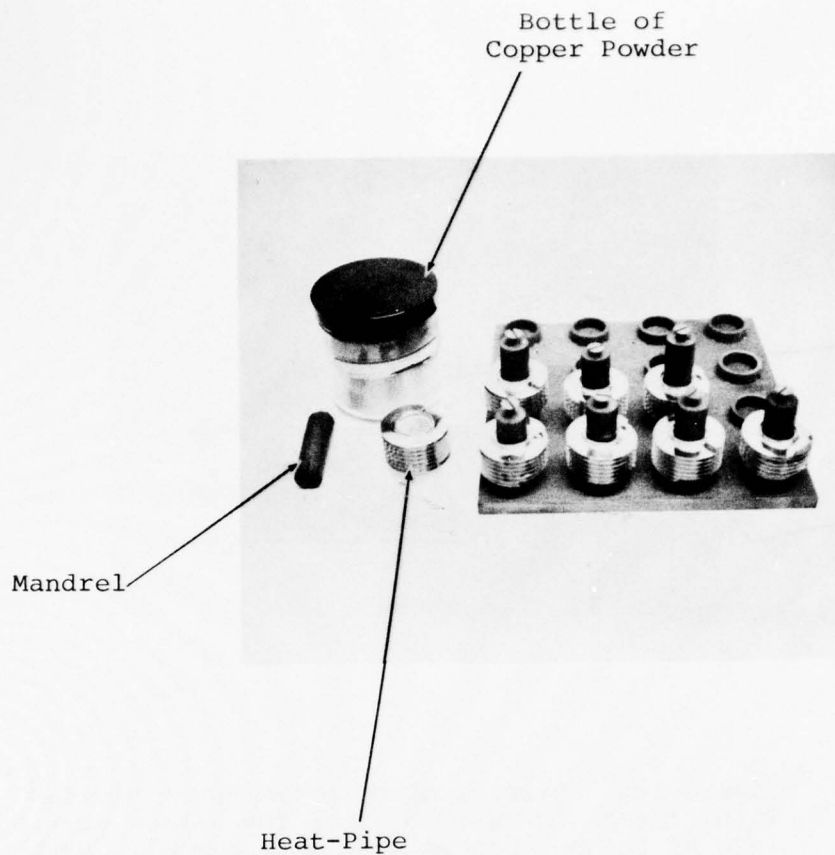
Wicking fixture. Sixteen heat-pipes can be simultaneously wicked using this fixture. Copper powder fills the space between the mandrel shown to the left and the inside wall of the heat-pipe. Slots in the mandrel on the left form the feeder webs within the wick.^e
